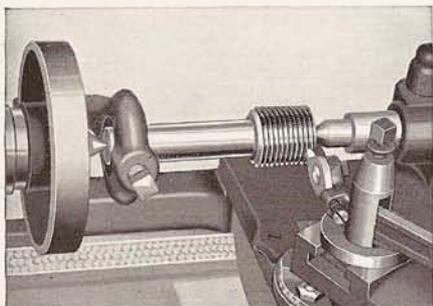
Cutting a Screw Thread on a Gauge in the 9-inch "Workshop" Lathe.
